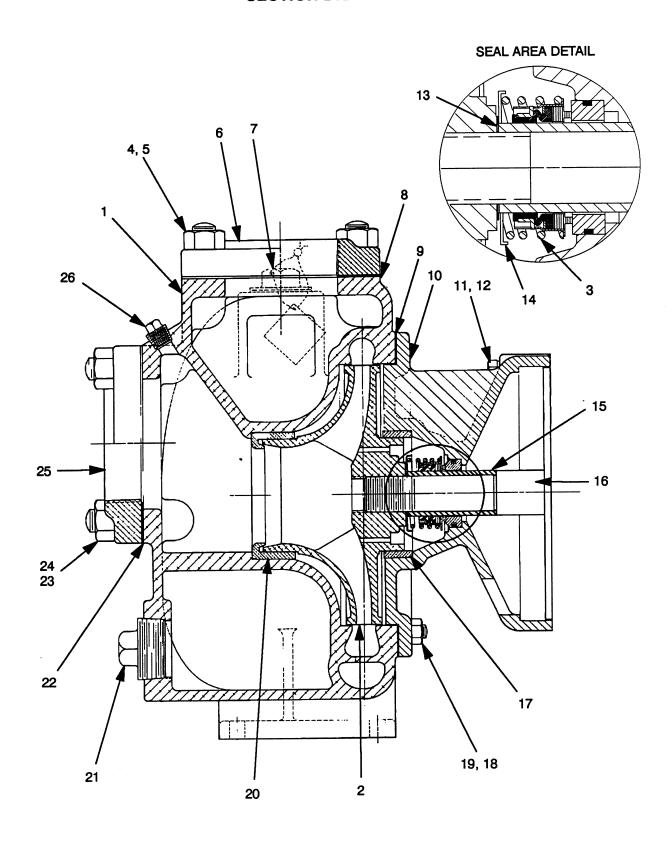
Pump End Assembly 03H1-(M12 S/G)
